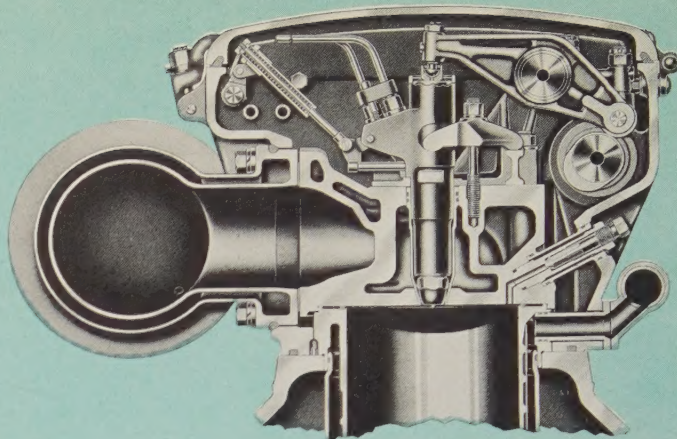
Cross-sectional view through the cylinder head and the standard type General Motors unit injector with control linkage and rack. Also shown is the exhaust manifold (left) and the water-inlet manifold (right).
